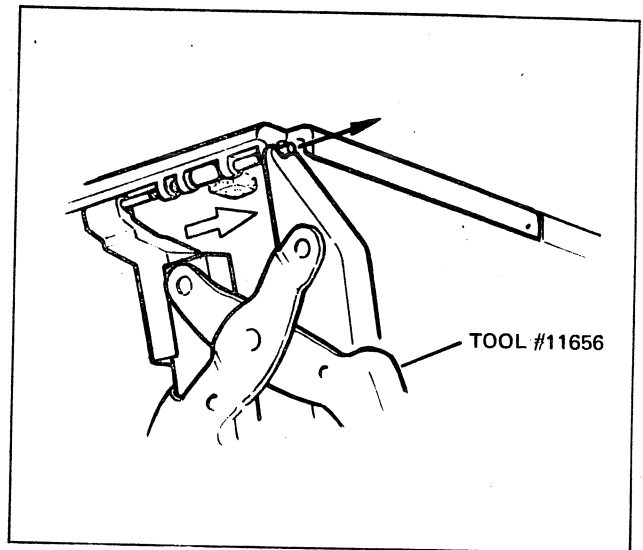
HINGE PIN REMOVAL TOOL
